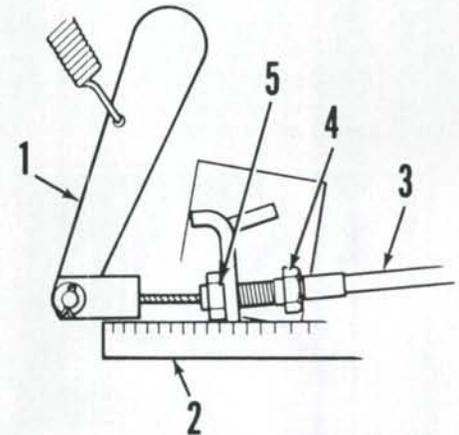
On 1194, 1290 and 1390 tractors equipped with independent type clutch, adjust clutch cable to provide 3-5 mm (1/8-1/4 inch) free movement of clutch cross-shaft lever.
